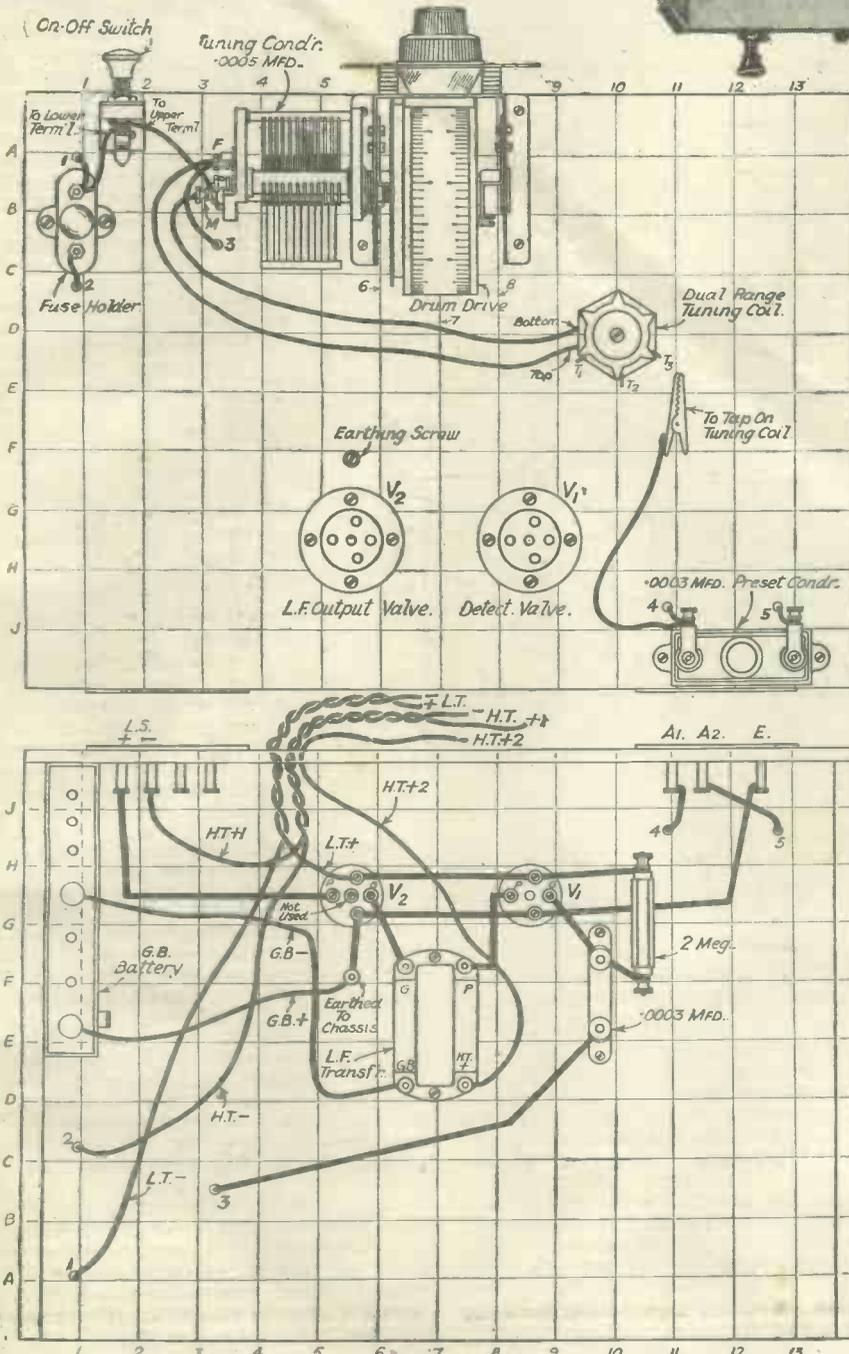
The under-chassis wiring and component arrangement is clearly shown in this photographic illustration.
